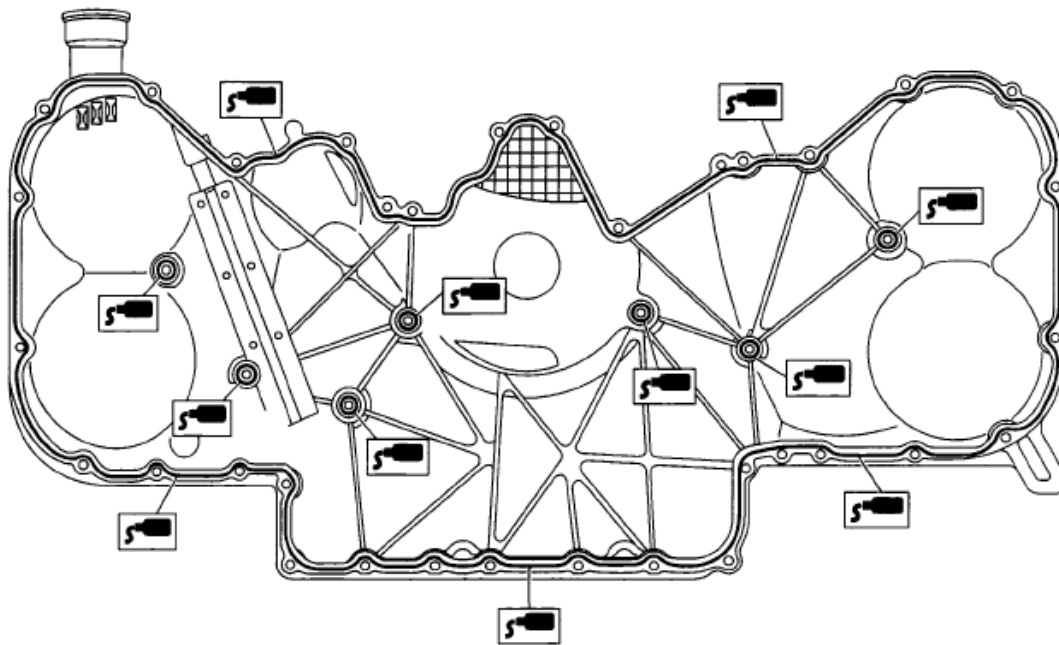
Identifying Cylinder Head And Oil Pan Upper
